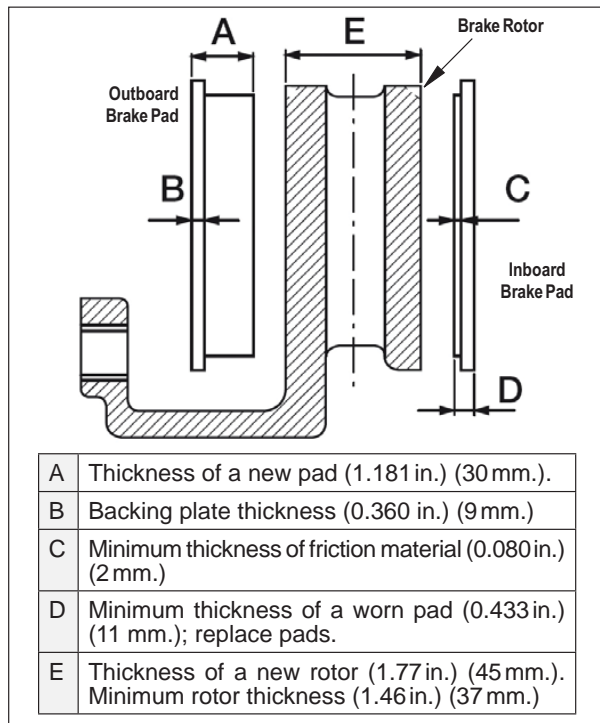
PAD AND ROTOR DIMENSIONS
